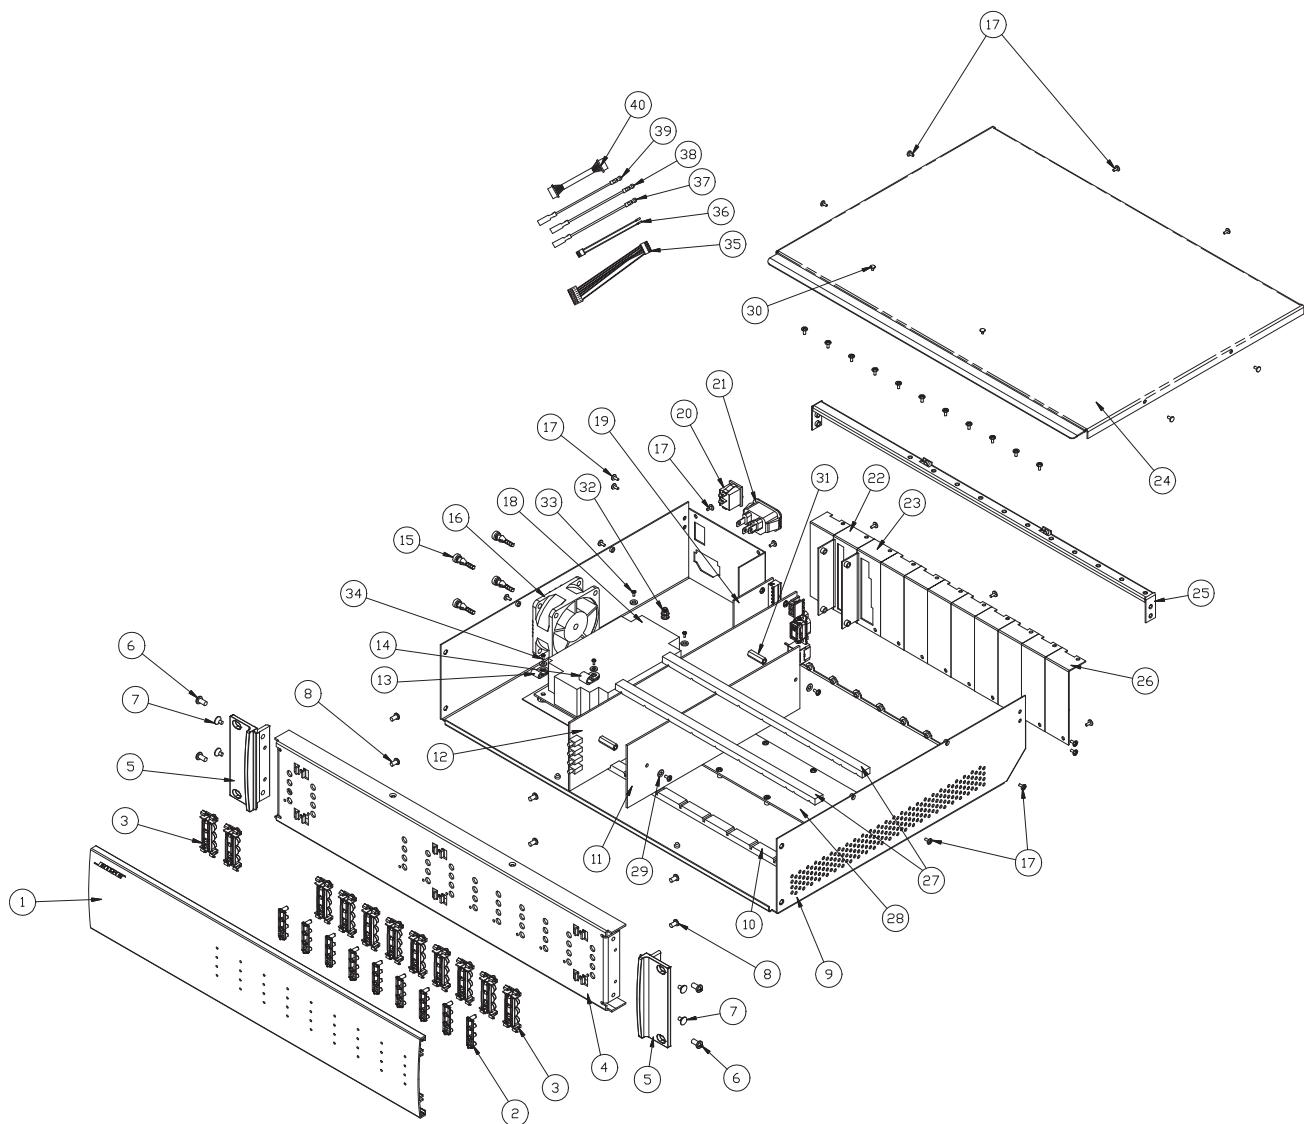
ControlSpace ESP-00 II Chassis Exploded View
